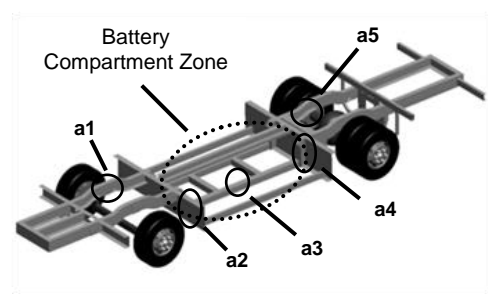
Example of a uniaxial strain gauge attachment on the bus chassis
